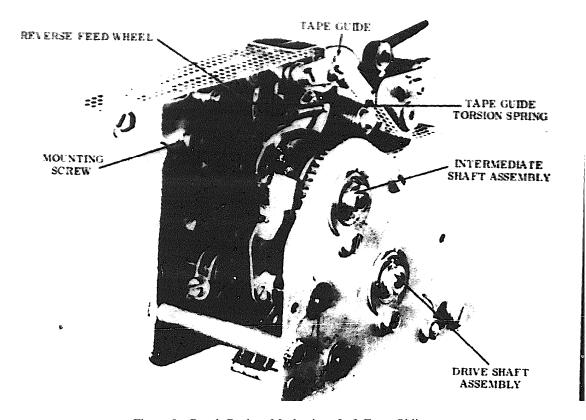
Punch Backup Mechanism, Left Front Oblique
